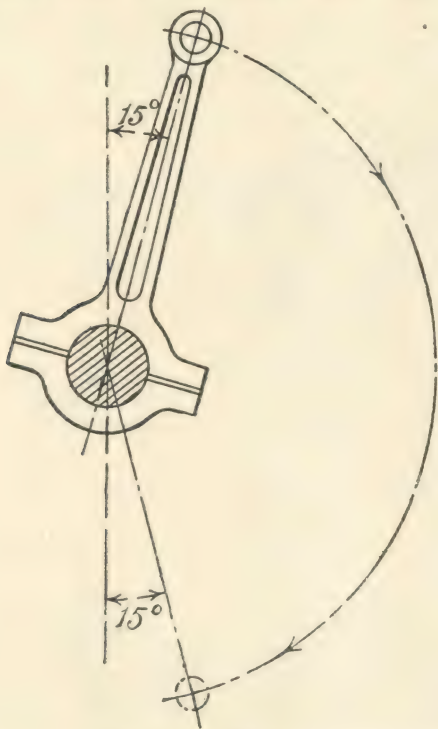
METHOD OF TESTING FIT OF BIG-END BEARING
